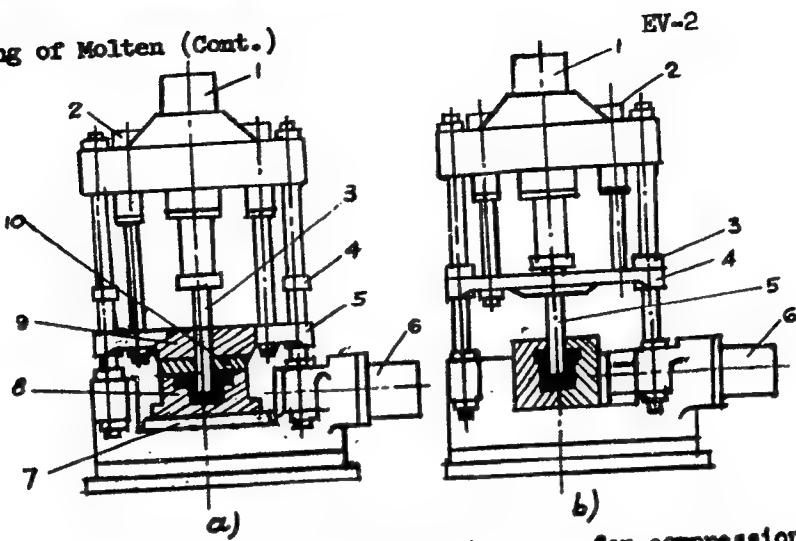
Schematic diagram of the universal ULM hydraulic press for compression molding of molten metal:
